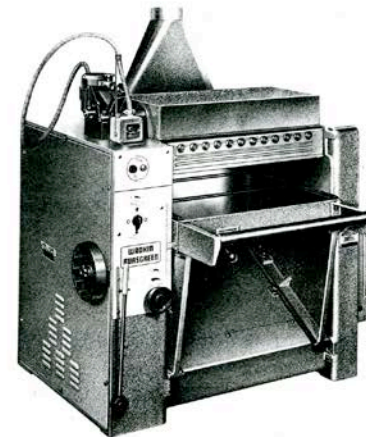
9 500 mm Panel Planer with Shaving Collector Hood and Sharpening Attachment.
